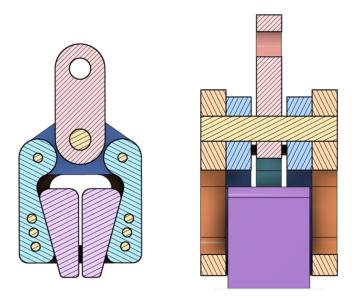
Section view of the grip assembly with jaw blocks shown in purple, housing plates shown in light and dark blue, orange plates to provide stiffness and constrain the jaws shown in orange and link attaching the Jaw to the Lever assembly in red.
